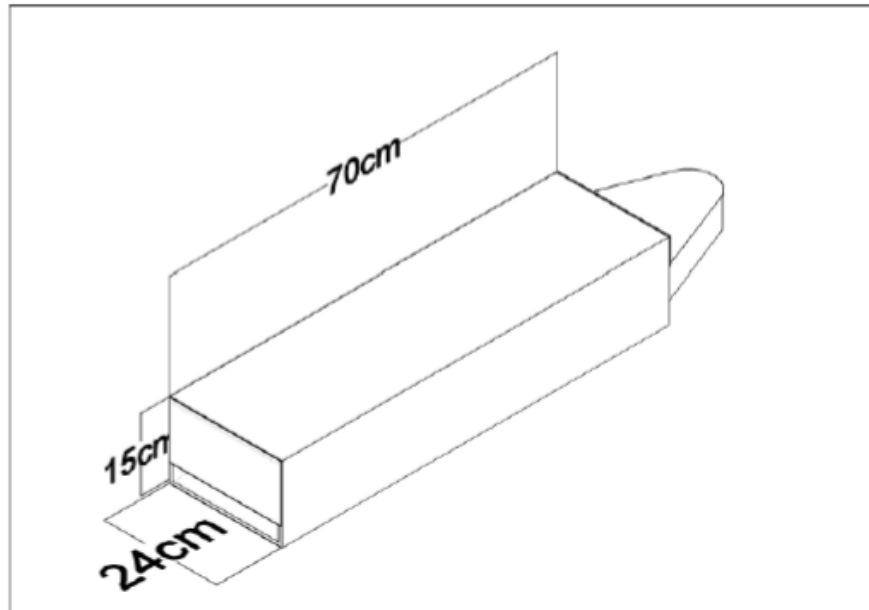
2-D of the Belt and Chain Cover of the Machine
